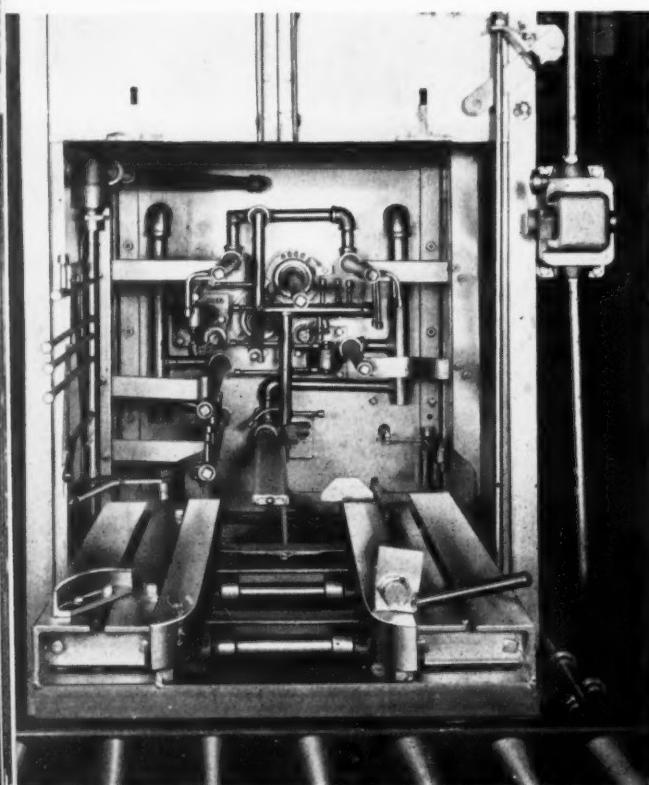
Cylinder-block Washing Machine with Side Panel Removed to Show a Block and the Carriage in the Washing Position
